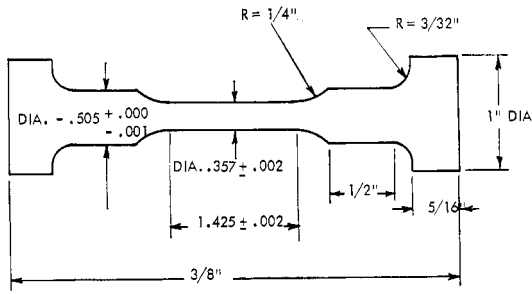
Schematic of test design (not to scale) for finish machined tension impact specimen.
